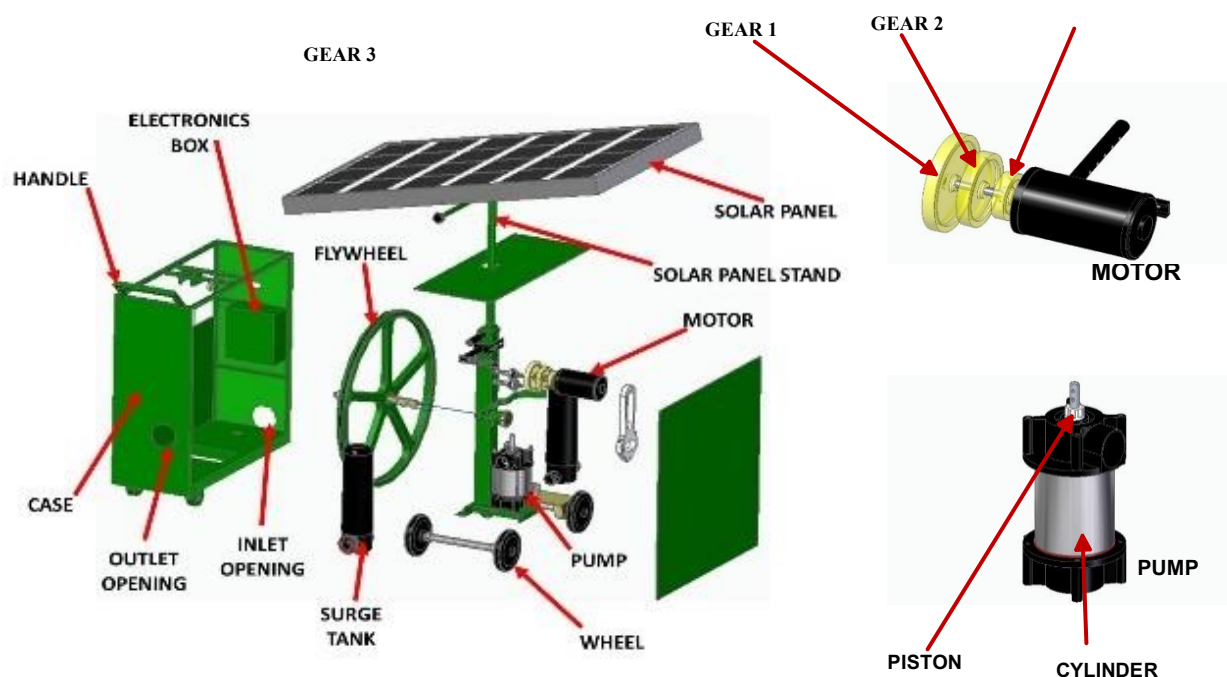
Exploded and Labelled CAD View of the Components of the Portable G-SIP
